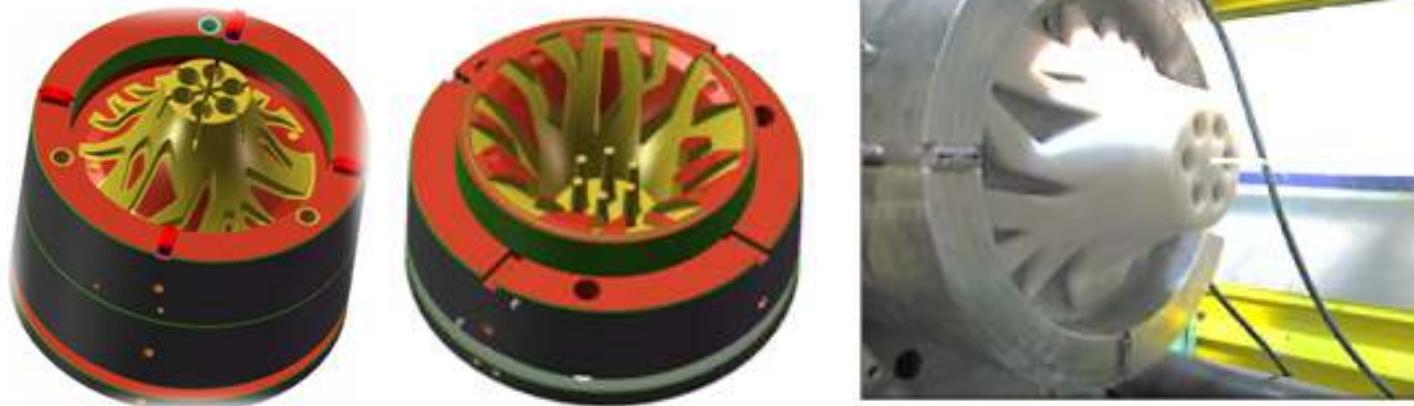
Prototype mould for production: views of the mould core and cavity, and of an actual moulding prior to ejection from the mould .
